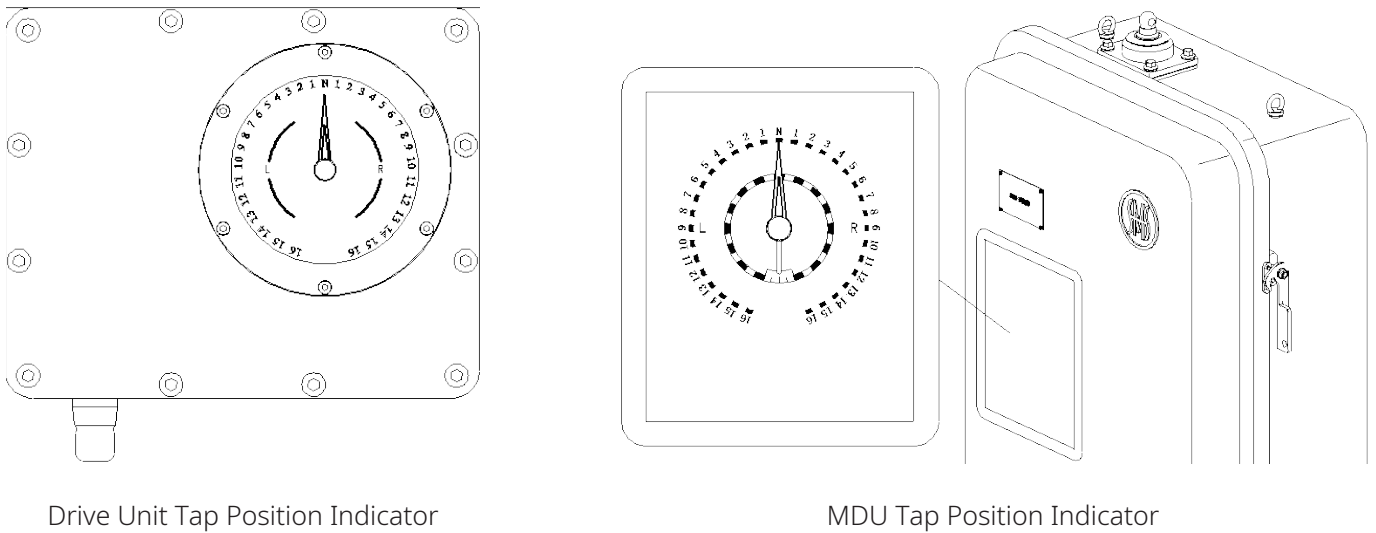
Drive Unit and MDU Tap Position Indicators
